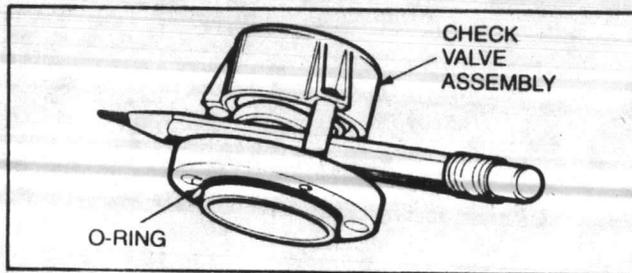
CLEANING 3/4" AND 1" CHECK VALVE
